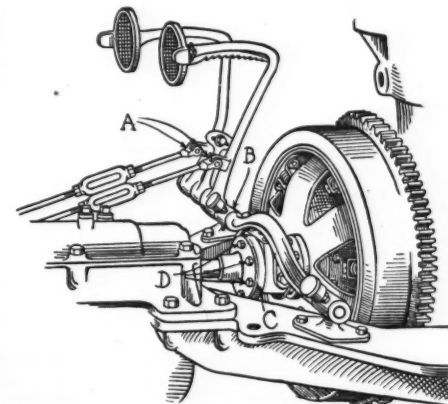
Reference to this will direct the removal of the flywheel, if such is considered necessary
